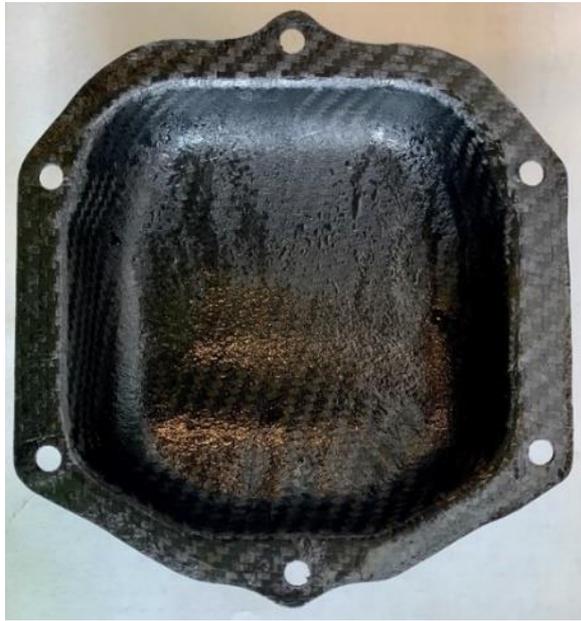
Internal surface of the carbon fiber valve cover post-run
